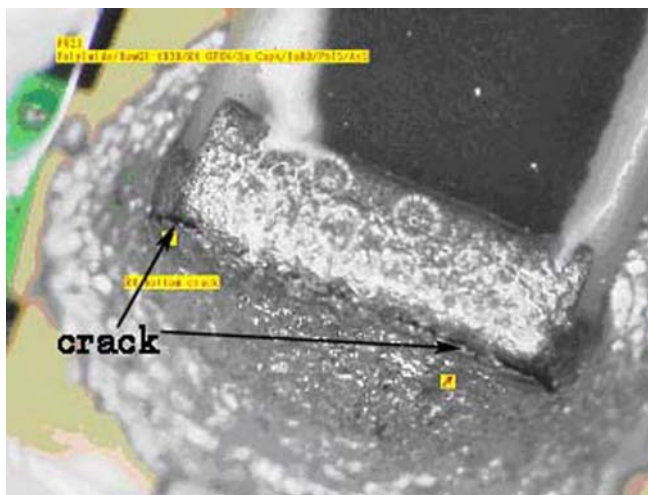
Top View of R4 Sn/Pb/Ag Finish Endcap Cracking using In80/Pb15/Ag5 Solder on Polyimide (175x)
